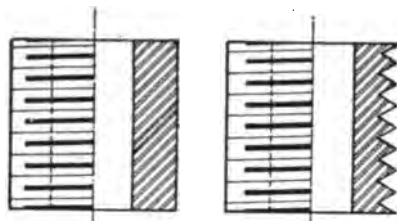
Conventional Drawing for Threads in Sectional Pieces,
